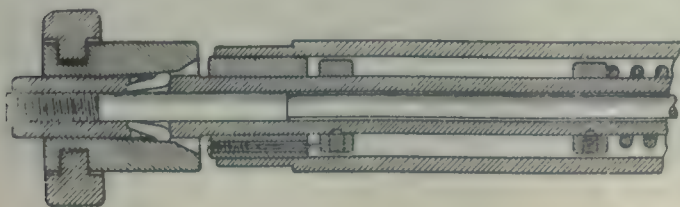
SECTIONAL VIEW OF EXPANDING CHUCK SHOWING DETAIL.
